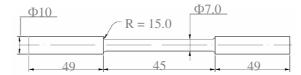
Geometry dimensions of rotating bending fatigue test specimens.
